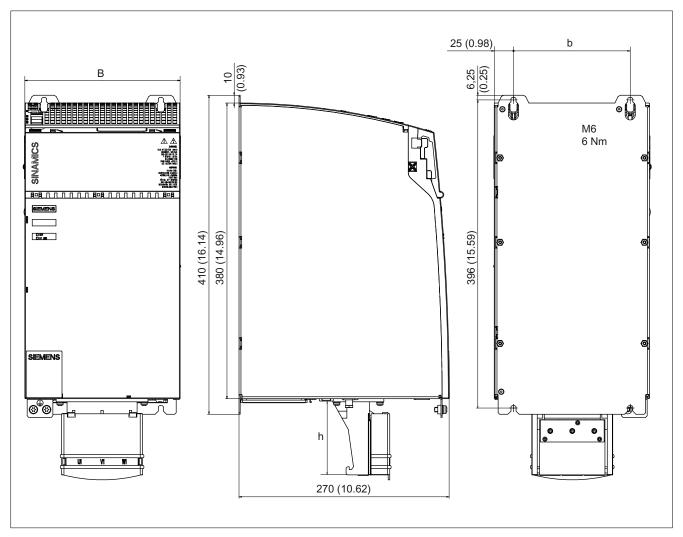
Dimension drawing of 36 kW and 55 kW Active Line Modules with internal air cooling, all dimensions in mm and (inches)
